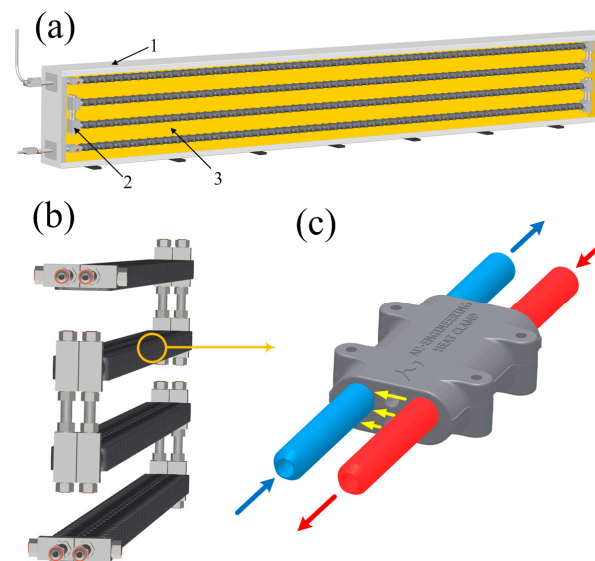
Heat exchanger. (a) Isometric view with a section cut which visualizes an internal construction of the unit; 1—coffer, 2—piping system with heating clamps, 3—insulation. (b) The piping system with the heating clamps. (c) The heating.
